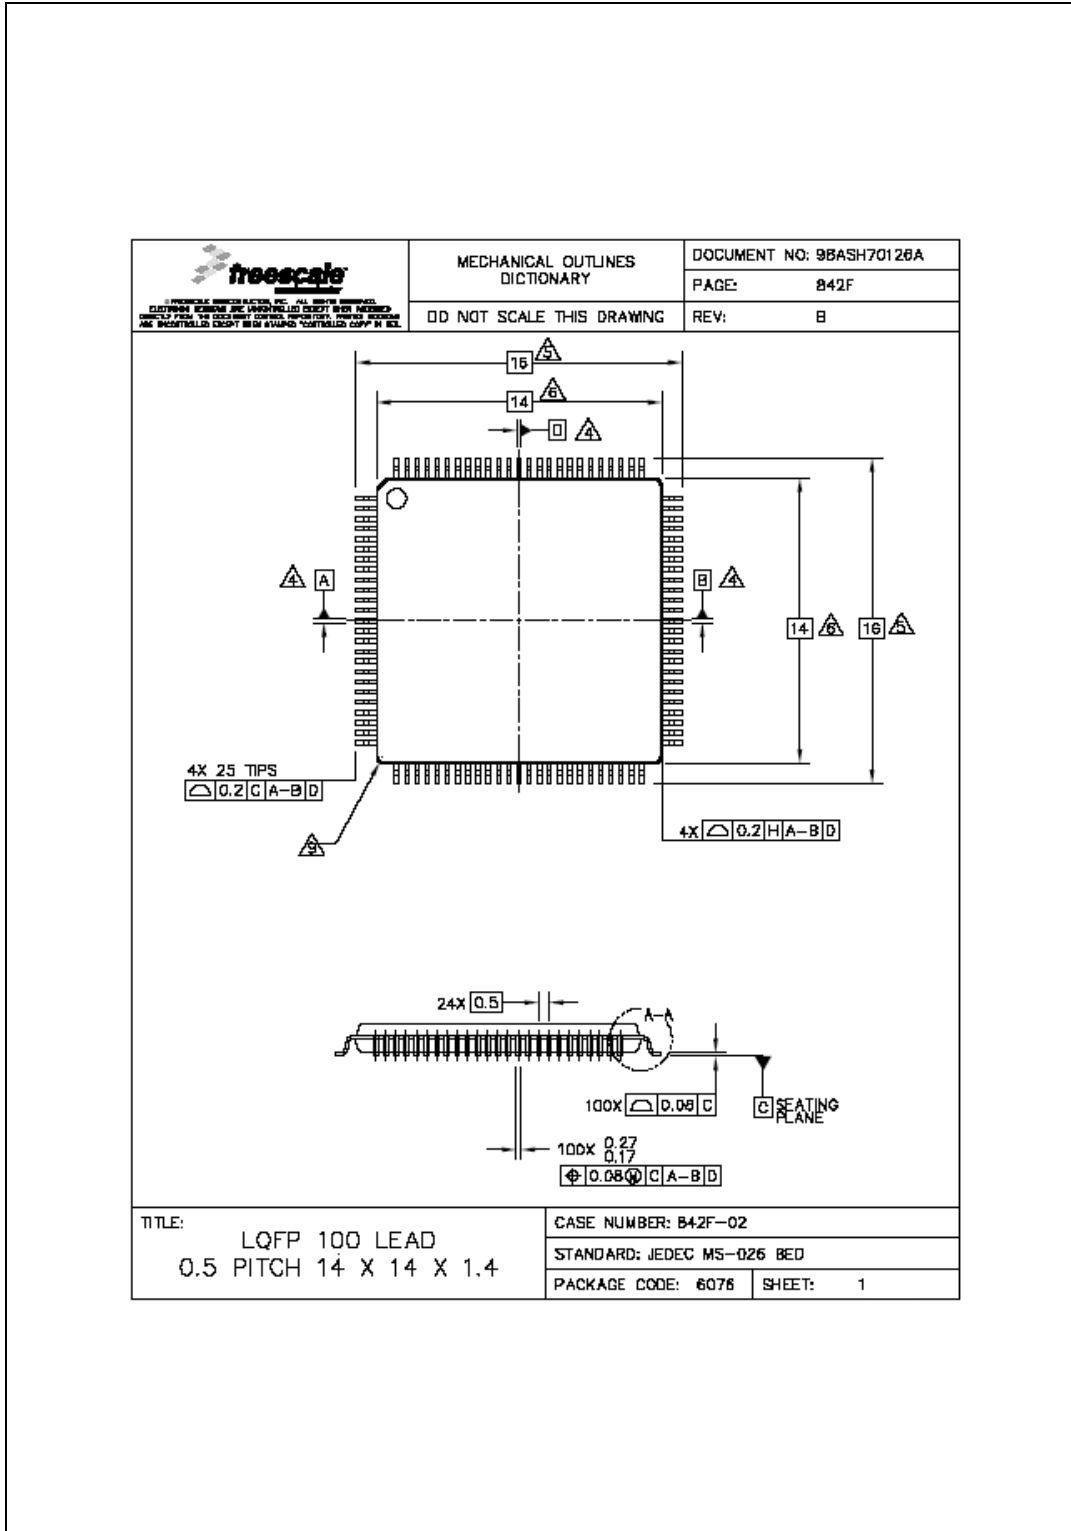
100 LQFP package mechanical drawing (Part 1 of 3)
